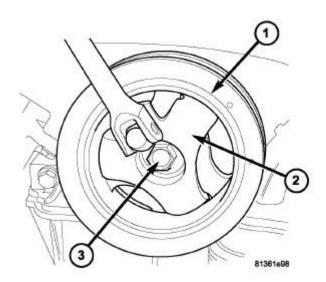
Damper, Bolt & Holder Courtesy of CHRYSLER LLC
